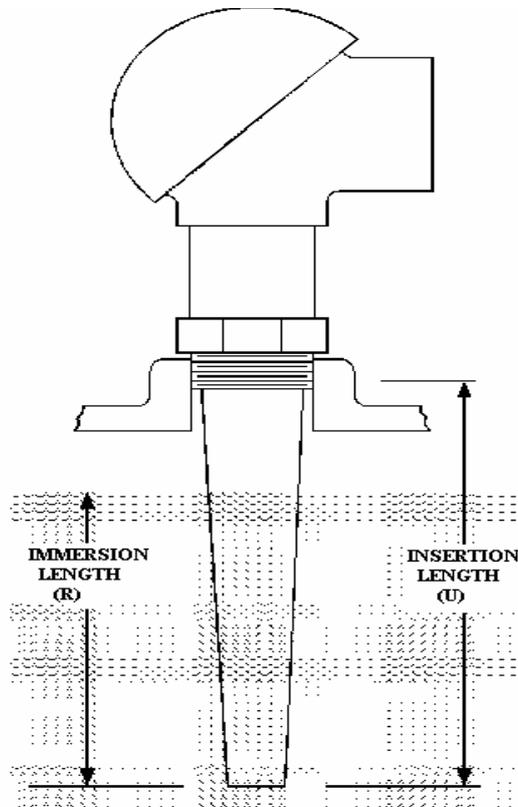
IMMERSION AND INSERTION LENGTHS FOR THERMOCOUPLE ASSEMBLY WITH THERMOWELL
